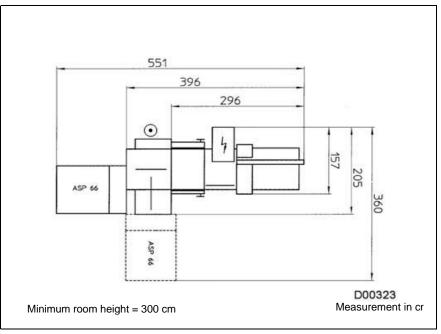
Floor plan for S-KTL - S-KTLT pile feeder
